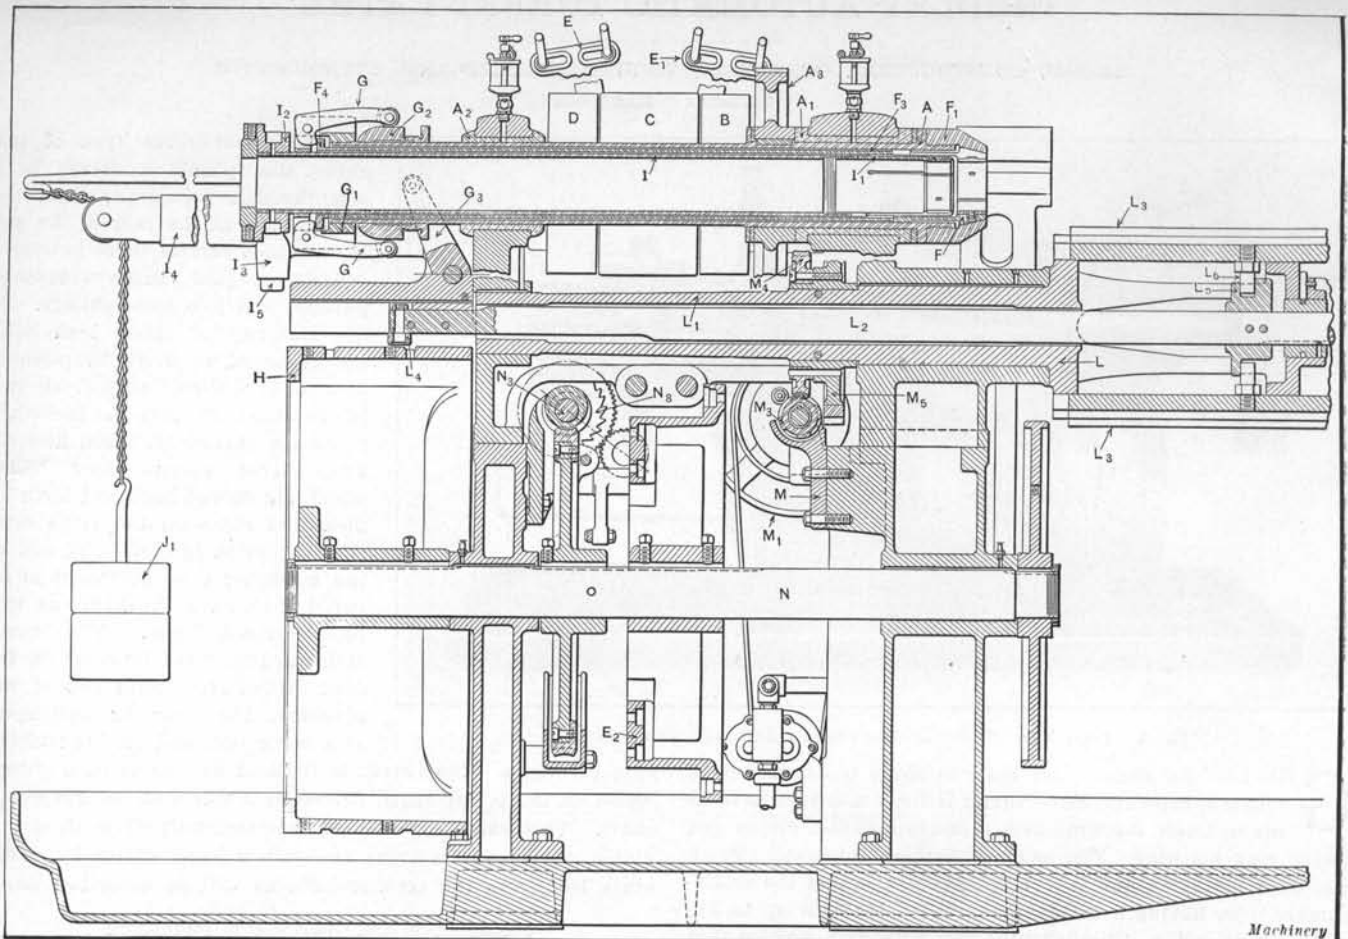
Sectional View taken through Gridley Single-spindle Automatic Turret Lathe, showing Spindle Construction, Turret Construction and Operation of Main Cam-shaft. Note that Turret is swung around out of Correct Position to show Section
